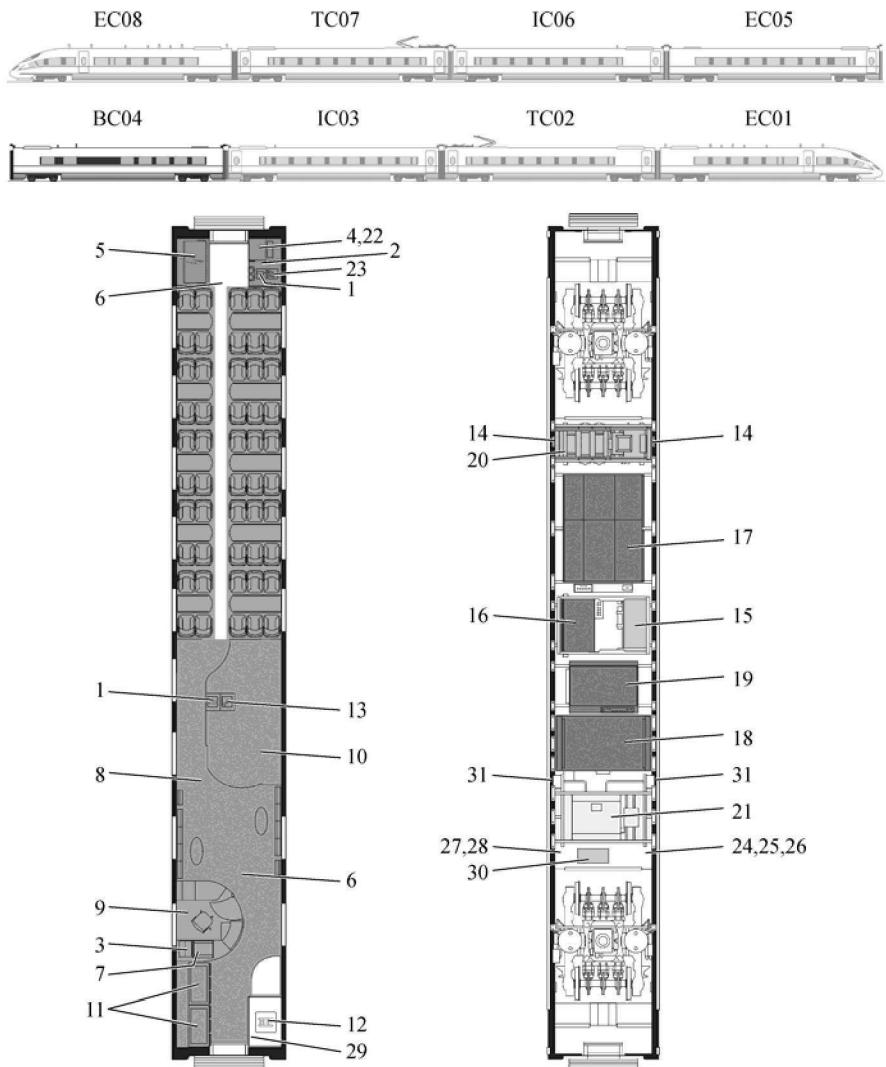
Interior and Underfloor Layout EC04 Car
